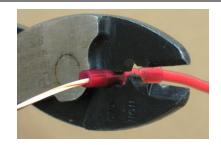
Crimping 10k Resistor Assembly To Sense Lead
